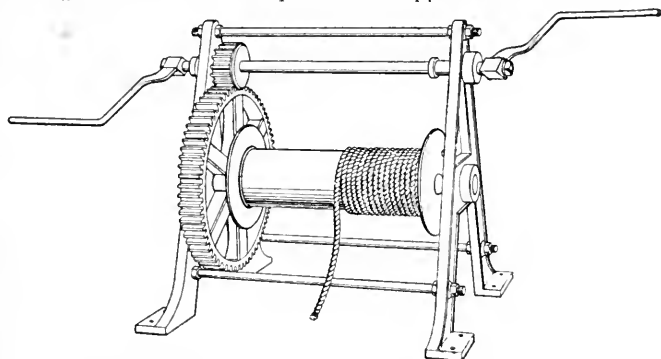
Windlass, with gearing, such as is used with a pile-driver.
